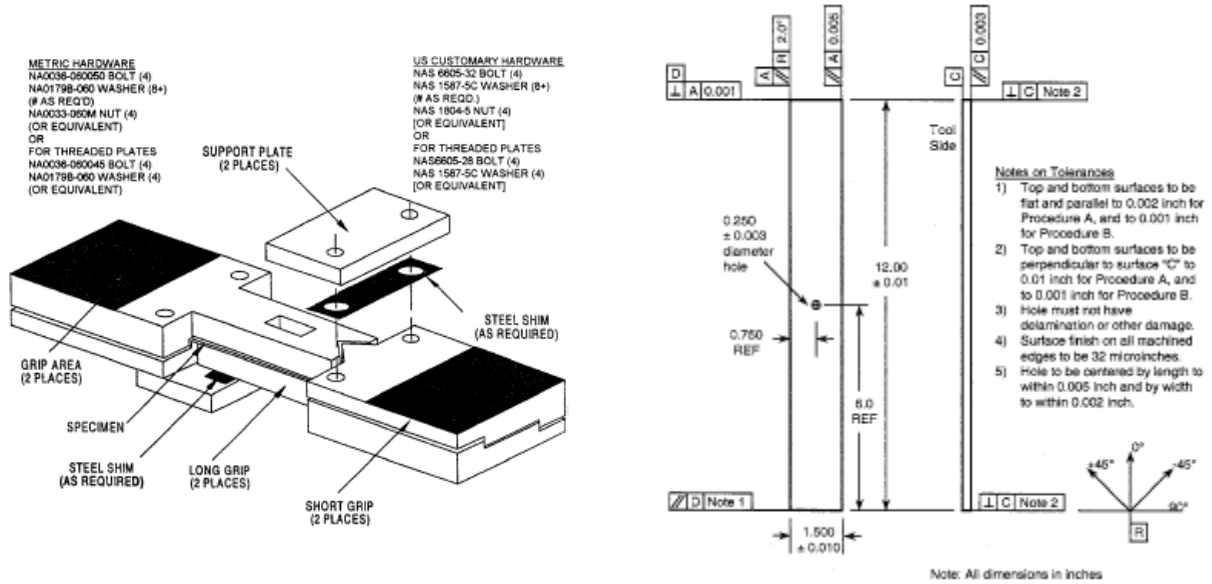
ASTM D5766 Test Specimen Schematic<sup>22</sup>
